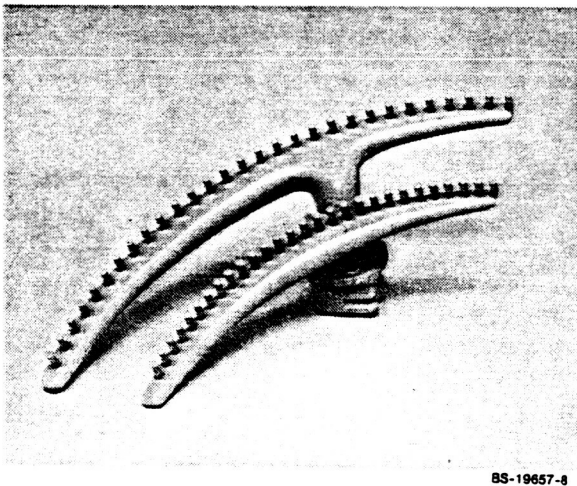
Ceramic Cores to Form Internal Flow Passages in Manifolds of Mod II Heater Head
